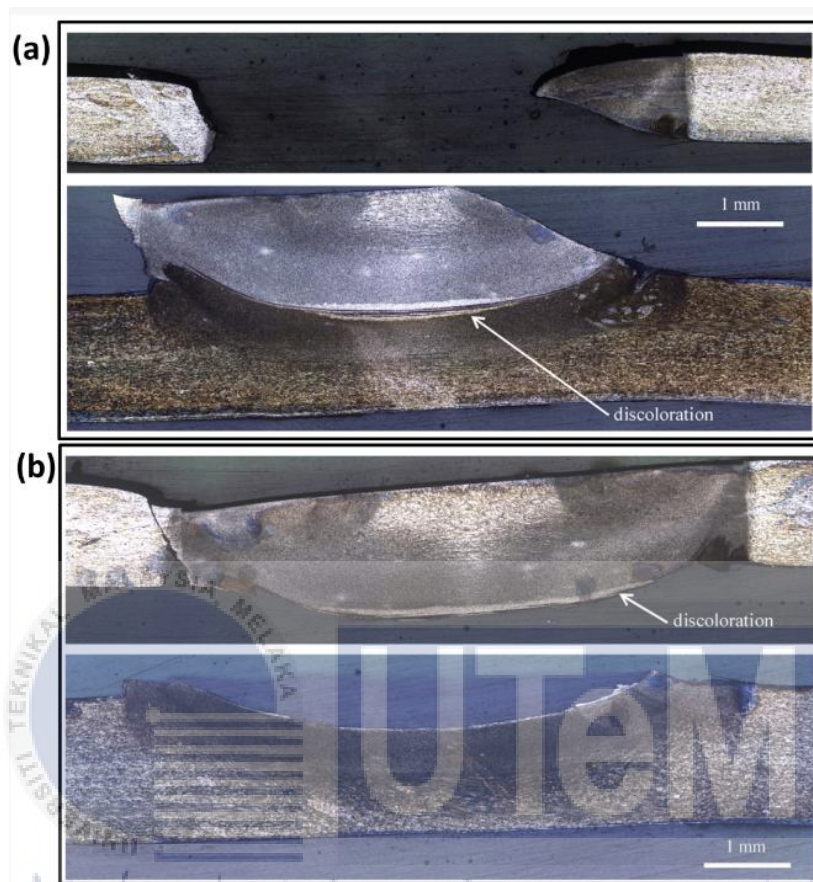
Failure mode of the FSW. (a) Cross-Section of nugget pullout failure:top sheet cross-section (top) and bottom sheet cross-section (bottom). (b) Cross-Section of interfacial failure:top sheet cross-section (top) and bottom
